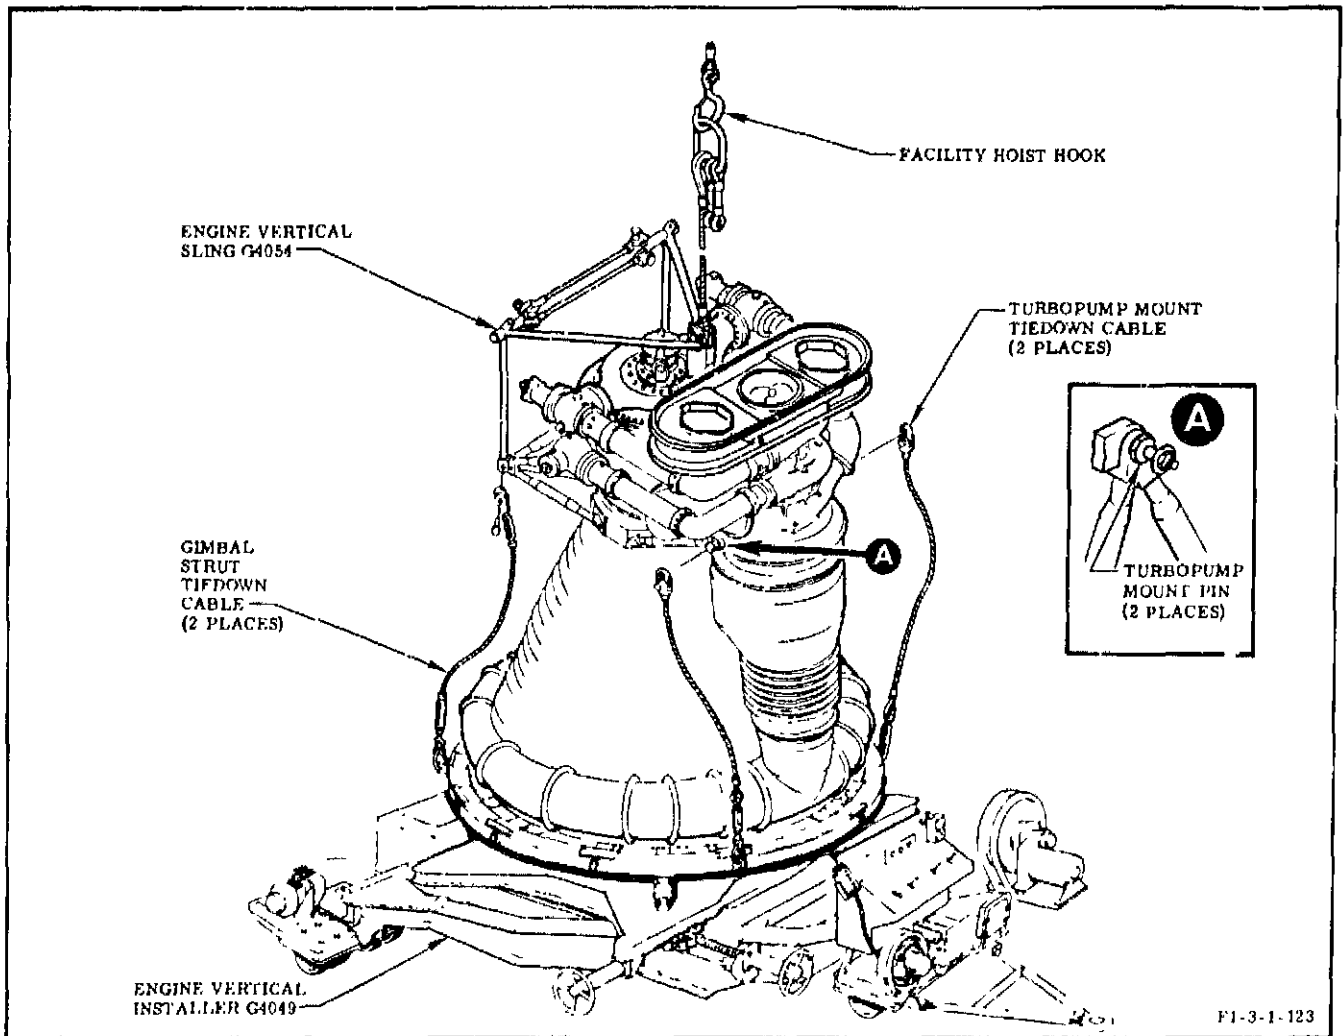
Removing and Installing Engine on Engine Vertical Installer
